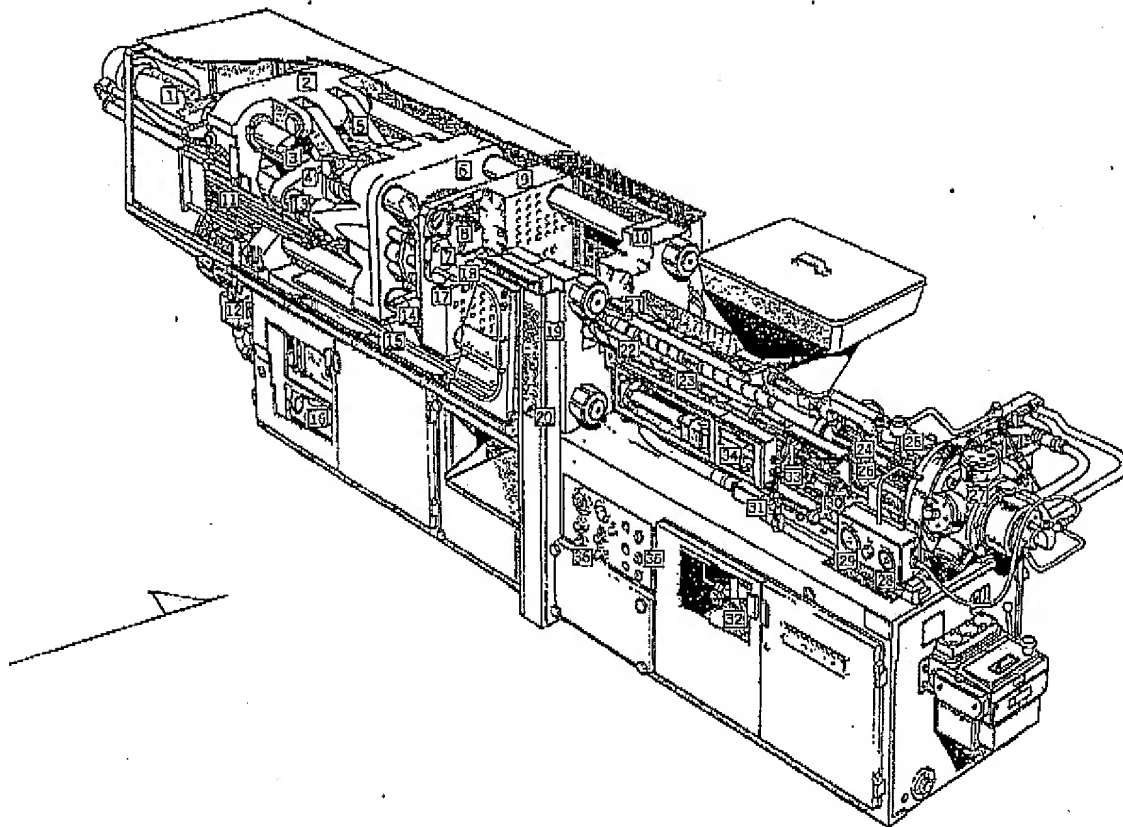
Cutaway view of a 300-t, 6.35-cm (2½-in.) reciprocating-screw machine (Peco molding machine). (1) hydraulic cylinder; (2) tail stock plate; (3) hydraulic piston extension; (4) toggle crosshead; (5) toggle link; (6) moving back plate; (7) ejector plate; (8) mold height-adjustment screw; (9) moving platen; (10) stationary platen; (11) limit switches and stops; (12) lubrication pump; (13) toggle crosshead guide bar; (14) mold height-adjustment mechanism; (15) moving-plate support pad; (16) hydraulic tank; (17) ejector bar; (18) hydraulic ejector; (19) solenoid indicator lights; (20) manual-control panel; (21) injection heating cylinder; (22) screw; (23) air tube and bore; (24) screw coupling; (25) bearing; (26) hydraulic-motor drive shaft; (27) hydraulic motor; (28) screw-speed indicator; (29) injection pressure gauge; (30) shot-volume control mechanism; (31) retraction stroke-limit switch; (32) screw-speed control; (33) injection secondary-pressure control; (34) hydraulic injection cylinder; (35) water valves; and (36) hydraulic controls.
